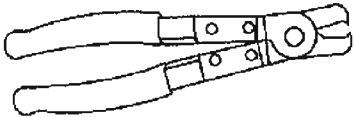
Installing CV Joint Boot Outer Retaining Clamp Using Special Tool
